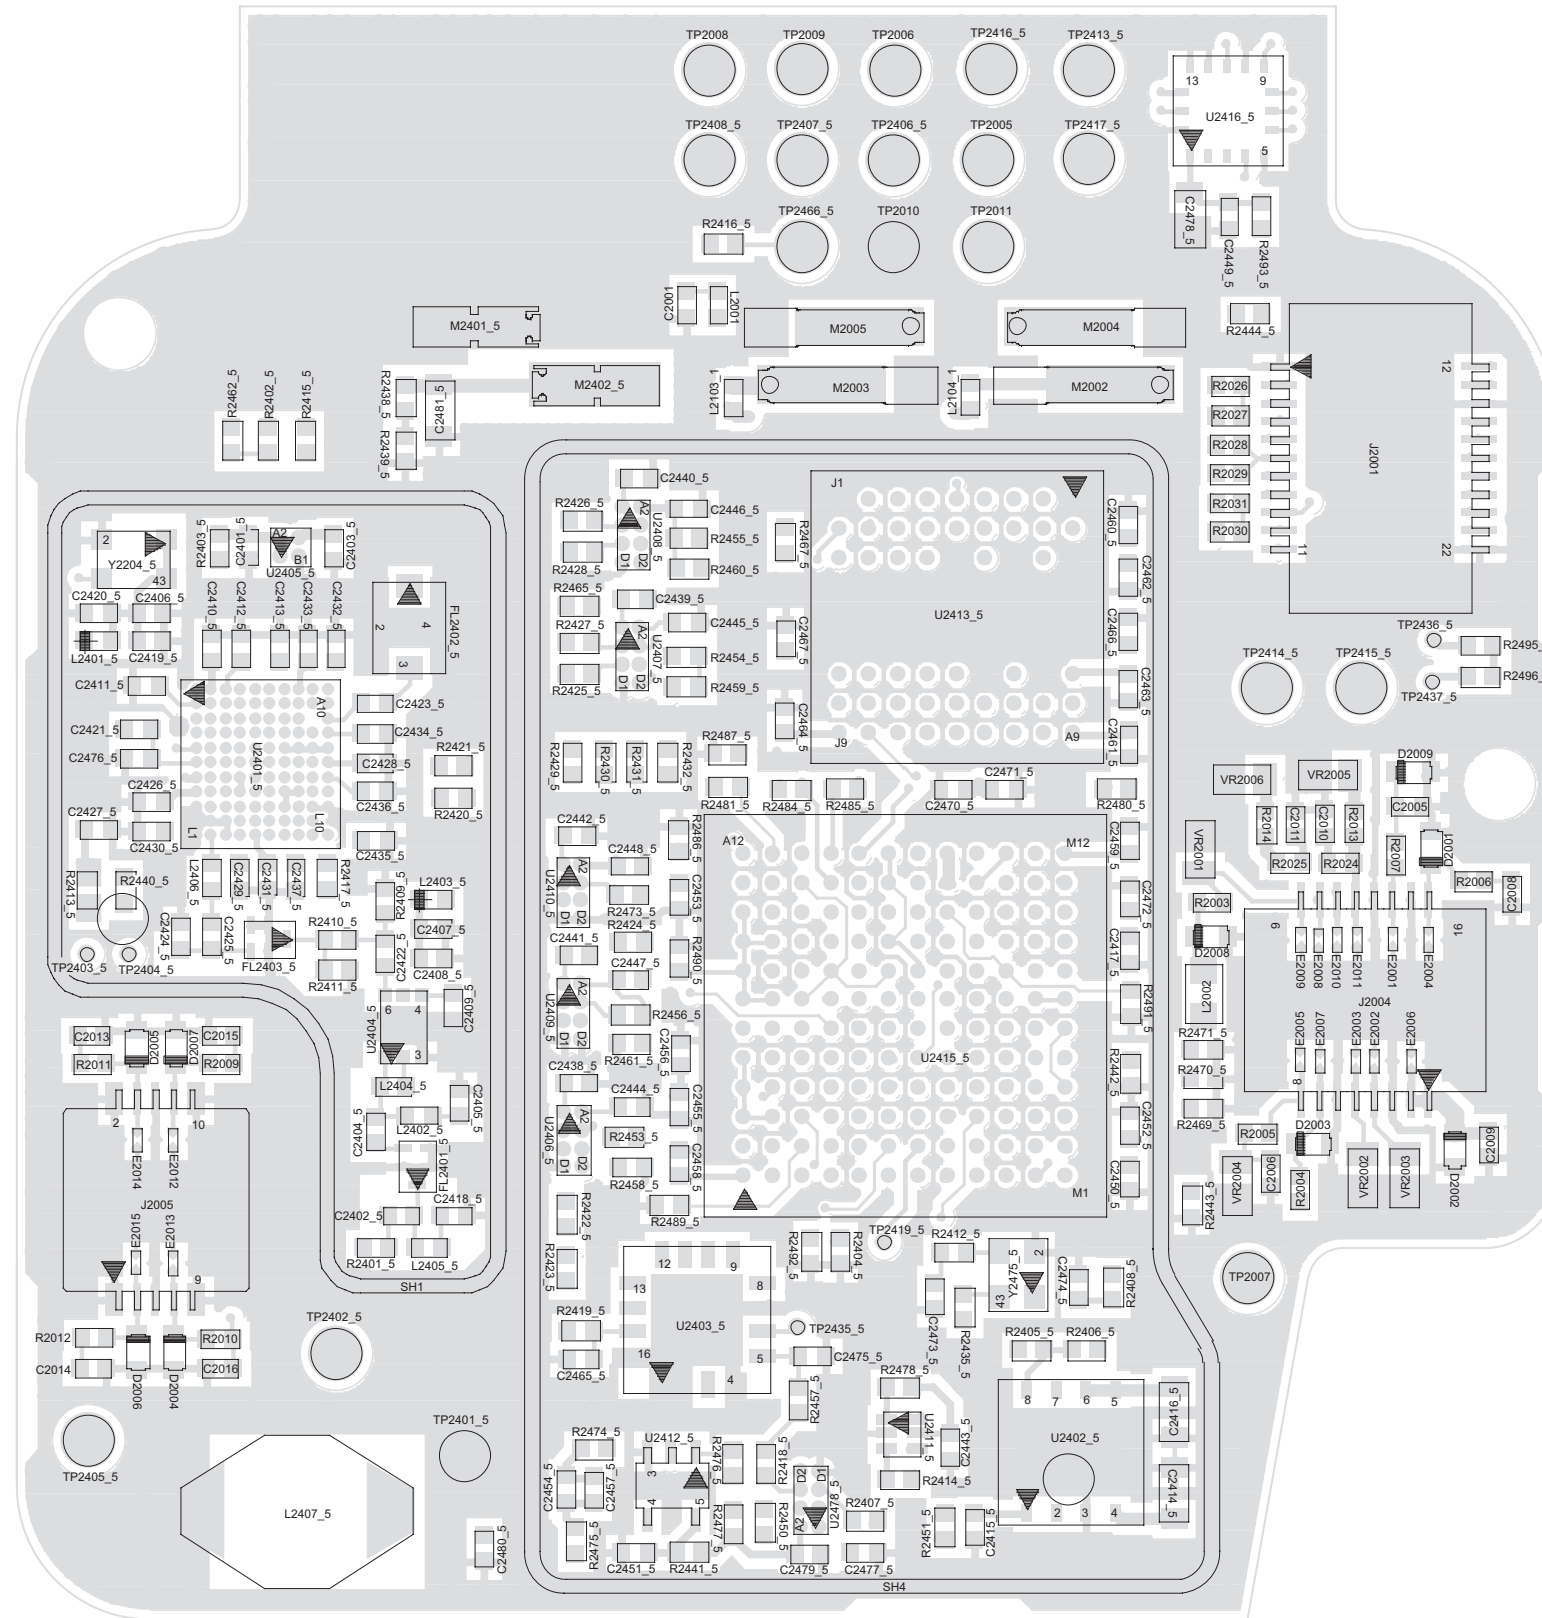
HLN5977A/ HLN5978B Expansion Board Layout – Side 2
